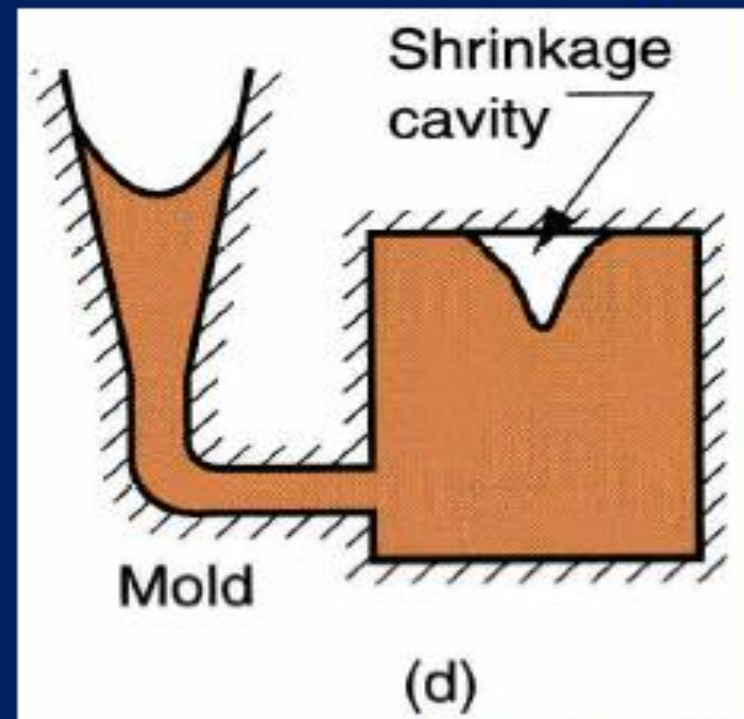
Some common defects in castings: (d) shrinkage cavity
